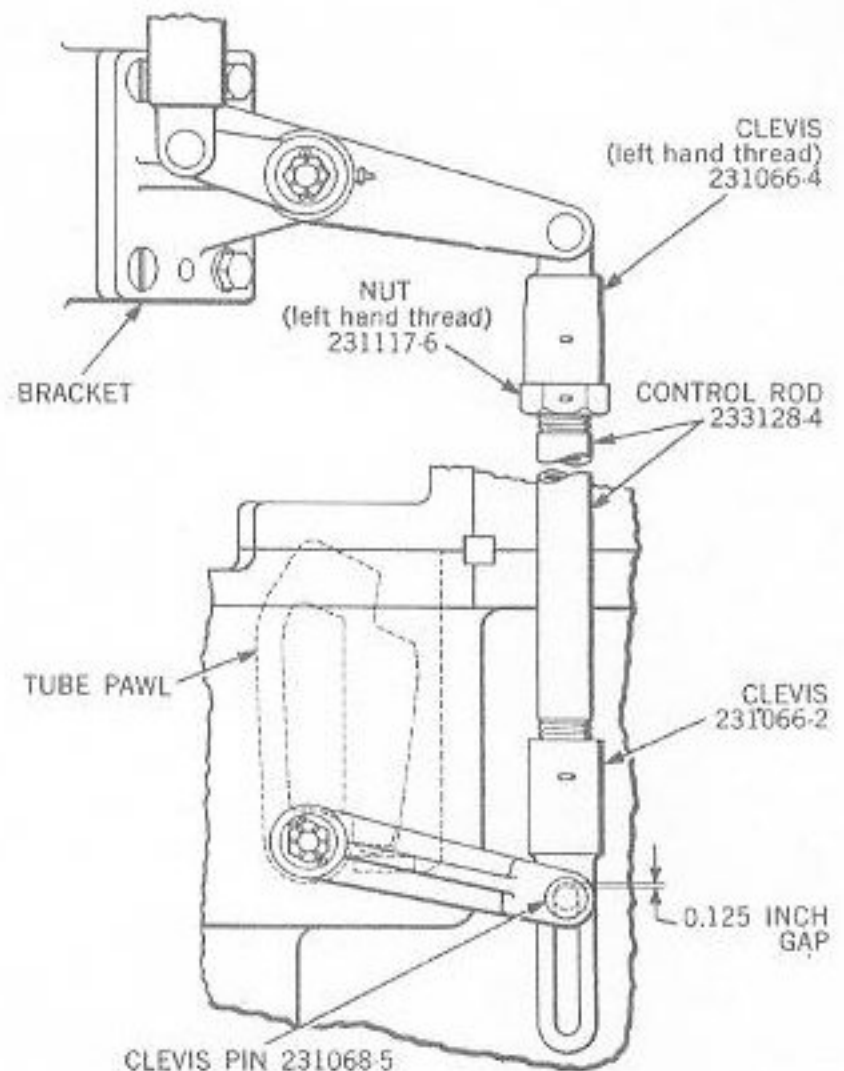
Projectile Hoist Tube Pawl Mechanism - Adjustment at Lower Intermediate and Lower Pawls
